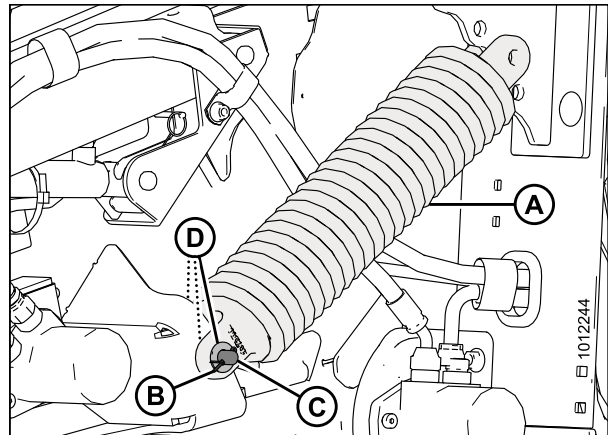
Left Side Front Anchor Shown – Right Side Opposite
